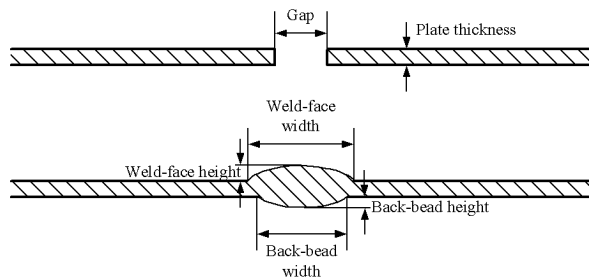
Measurement on the plates before and after welding. Welding is made from above.
